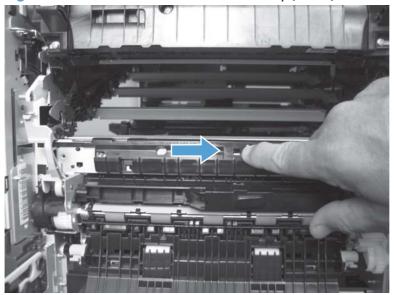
Remove the RD sensor assembly (2 of 6)
